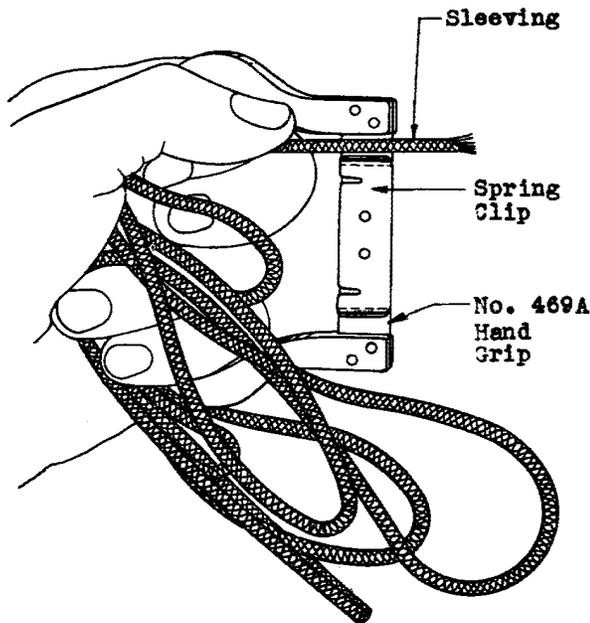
Holding Sleeving and No. 469A Hand Grip Preparatory To Inserting Sleeving In Slot of Spring Clip
